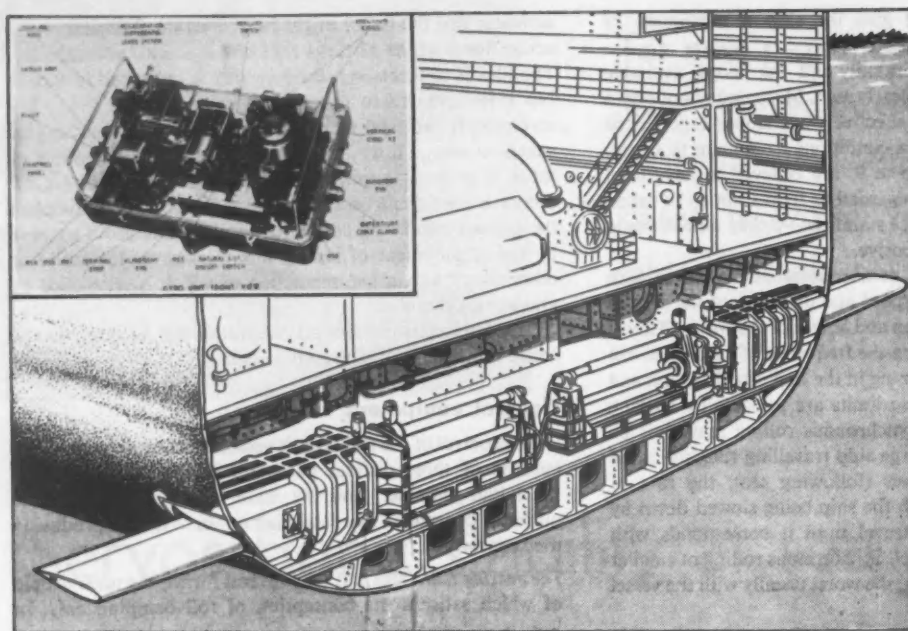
A typical arrangement of the stabilizing fins in a ship with the fin operating and retracting gear mounted on the frame at the end of each fin box. The fin box is welded to the hull and is flooded when the ship is in commission. Inset is the gyroscope sensing unit
